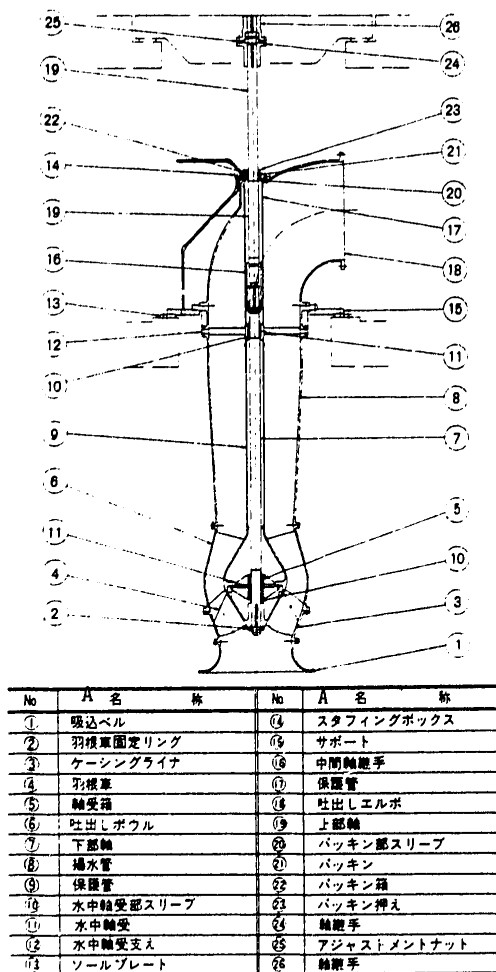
Structural Diagram Can Be Constructed Using Plan Diagram
